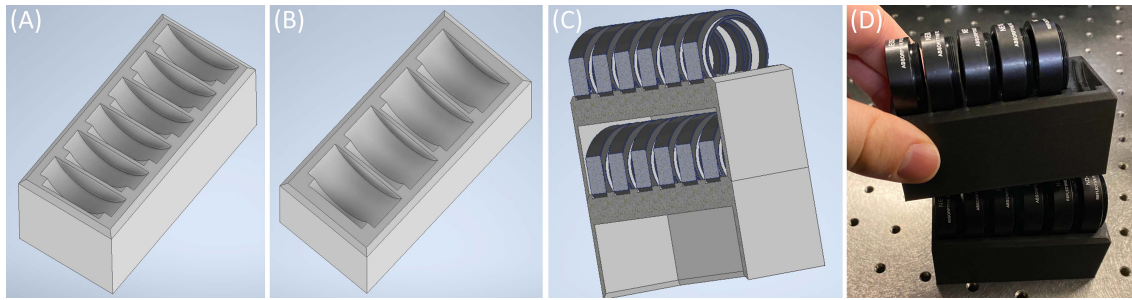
(A) 3D CAD of the SM1L03 tube holder. (B) 3D CAD of the SM1L05 tube holder. (C) Sectional view of the 3D CAD depicting the stackability of the SM1 tube holders. (D) Image of the actual 3D printed SM1 tube holders; material: Onyx.
